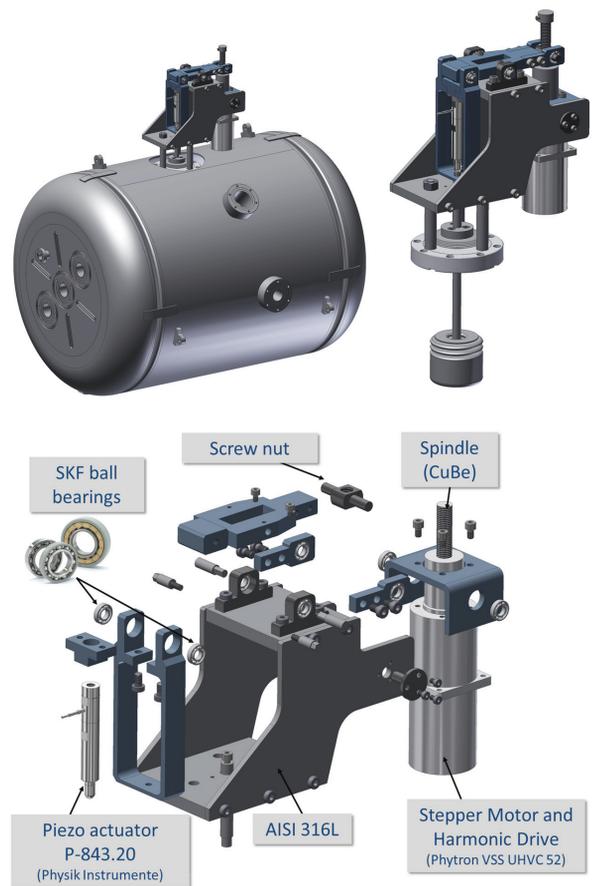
Tuner drive mounted to the helium vessel of a sc CH cavity and frequency tuning system including dynamic bellow tuner (top), exploded view drawing of all single components of the tuner drive (bottom).
